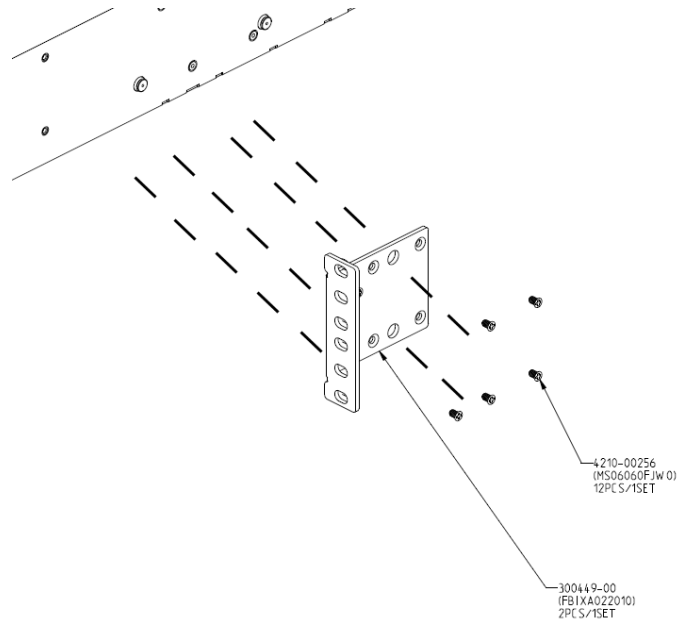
Attaching a Short Mounting Bracket (Ear): Middle of Switch
